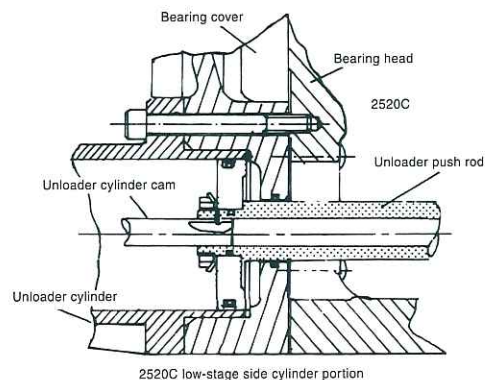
Low-stage side Unloader Cylinder Fitting Section, Sectional View
